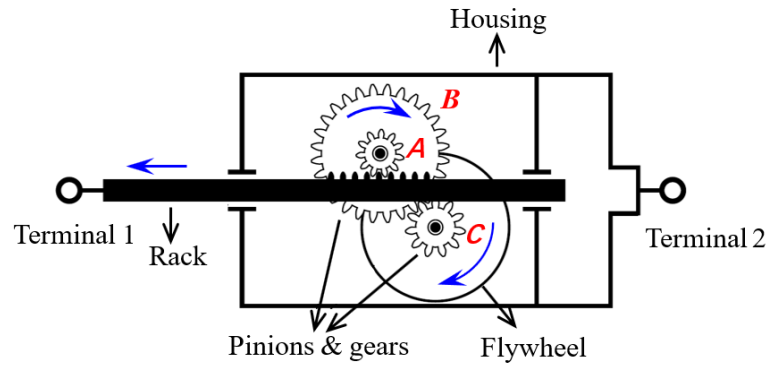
Schematic drawing of rack-and-pinion inerter (after [26])
